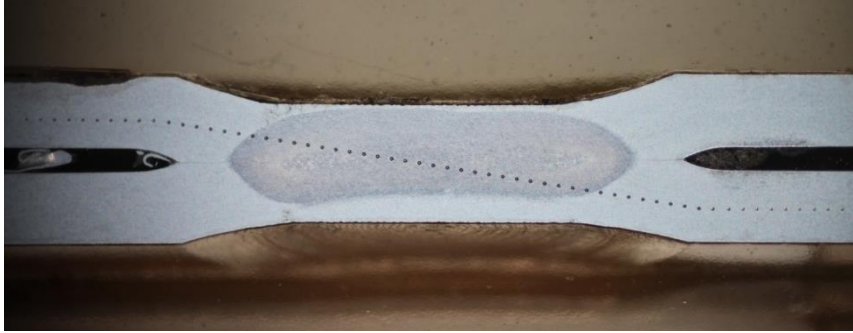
Hardness identifications through the weld nugget and the HAZ on AA6082 alloy ($t = 1$ mm).
